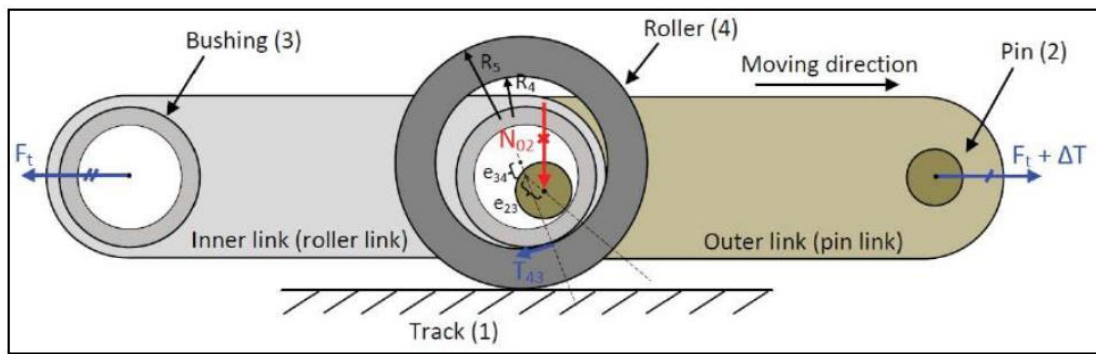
Section view of a roller chain with exaggerated clearances [30]
